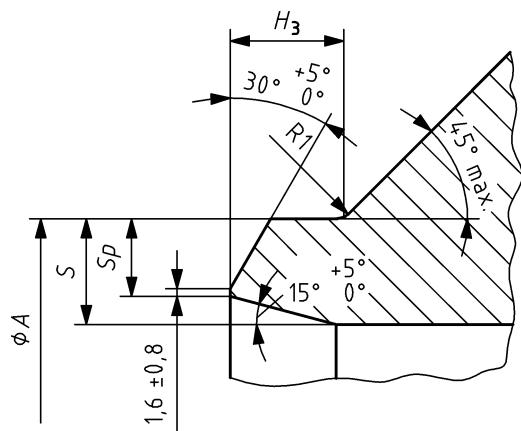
Welding end connection for wall thickness  $S < 22,2$  mm
